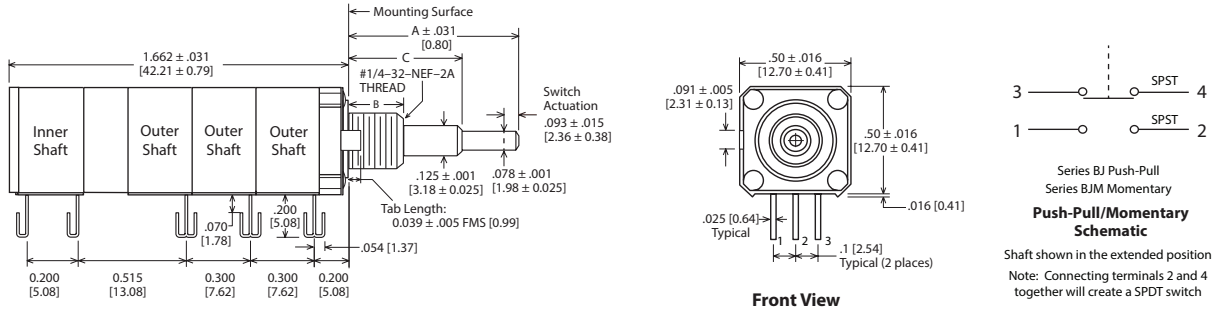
SHA-22: Concentric Shafts, B22, 3 Potentiometer(s) or RS + MP, 1/4" Bushing
